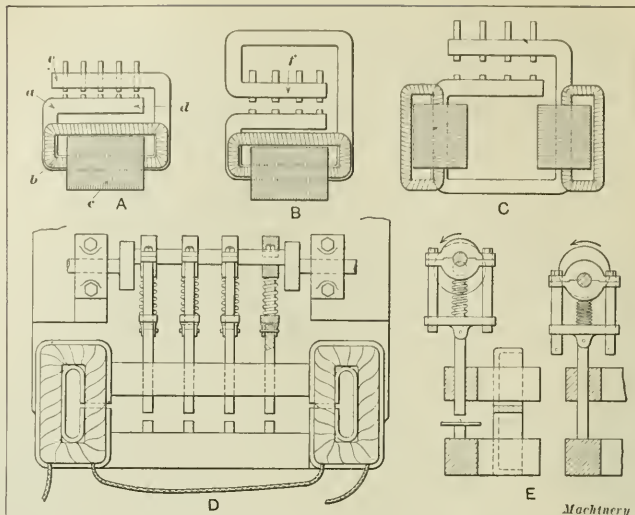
Diagram illustrating Principle of Design of Multiple Electrode Welding Machines
